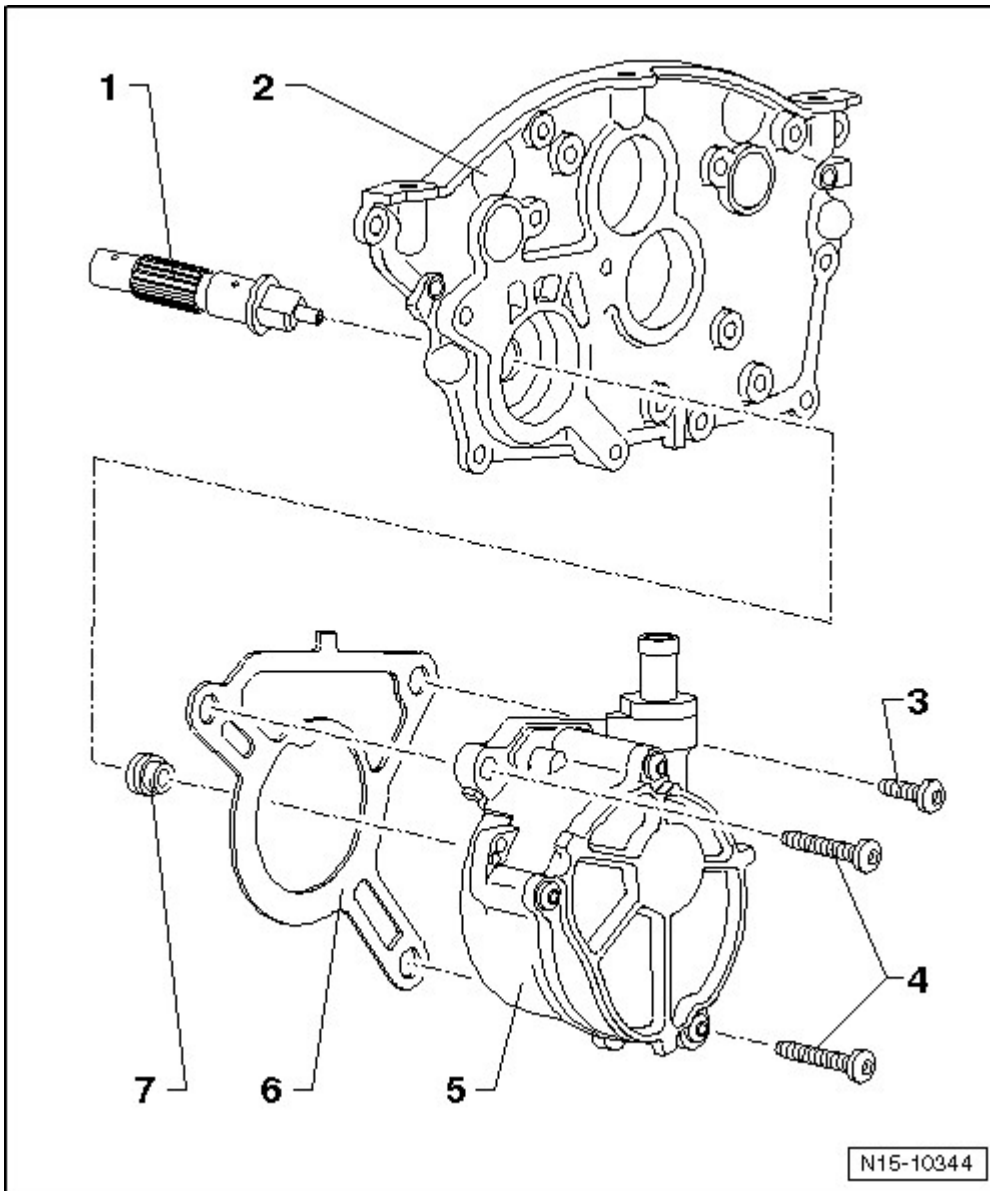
Identifying Mechanical Vacuum Pump, Assembly Overview
